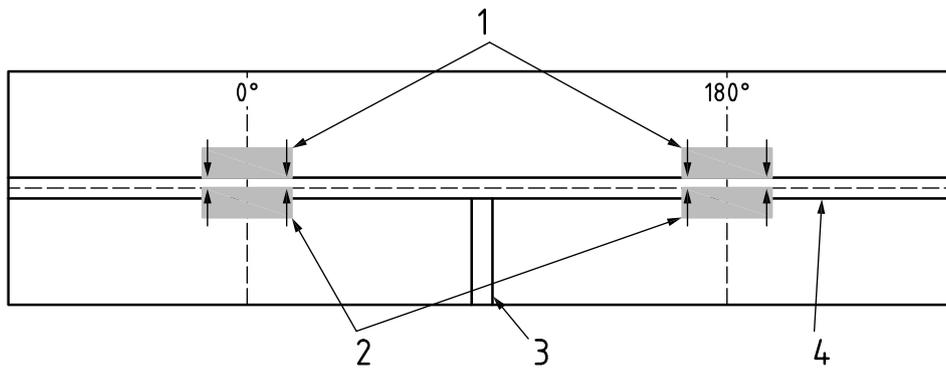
Expanded view of the pipe specimen showing the location of the two metallographic sections to be taken from a helically welded pipe
